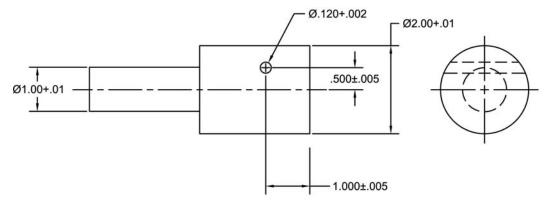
"OLD" Drawing without GD&T.
